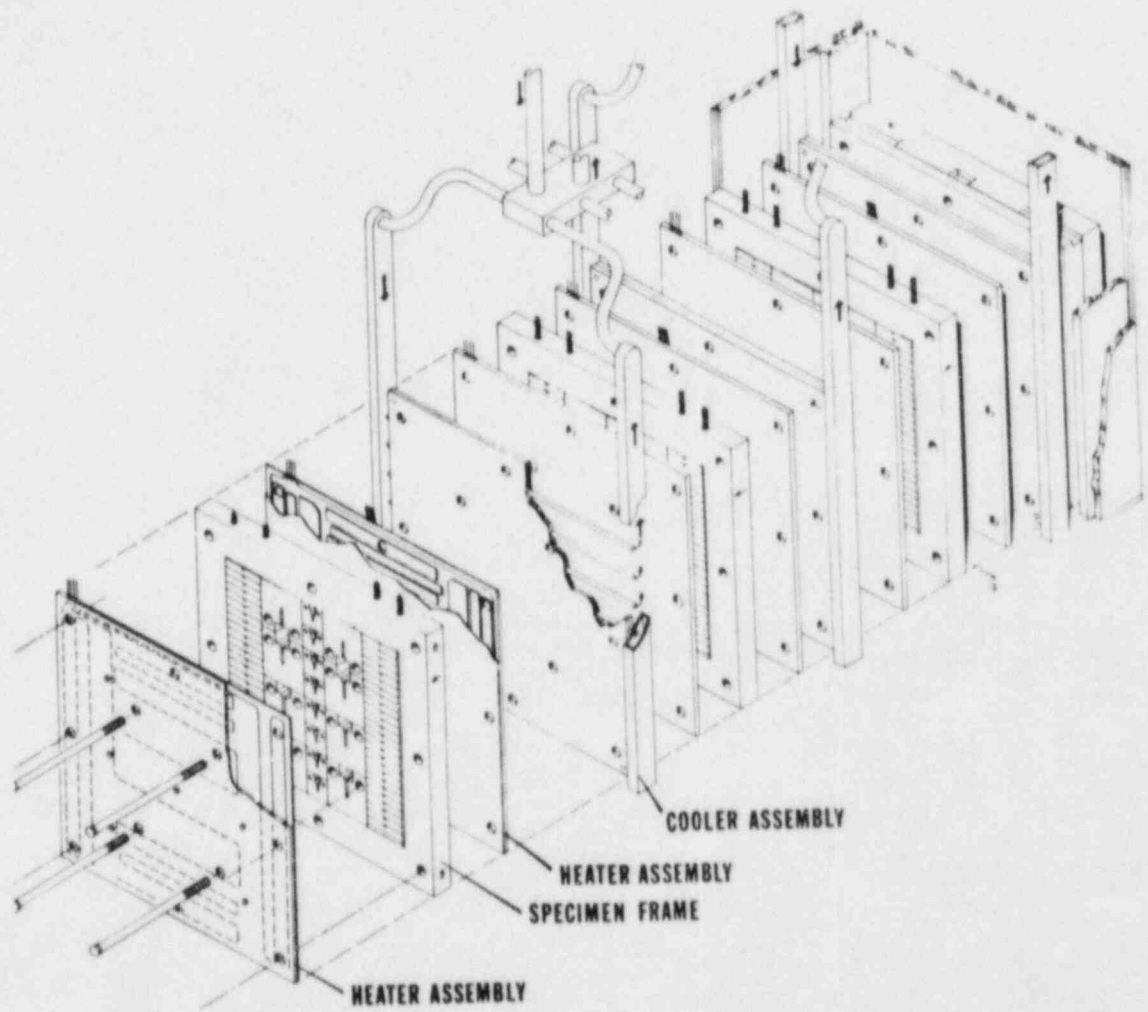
Exploded view of a specimen irradiation capsule showing capsule internal components (courtesy ORNL).
